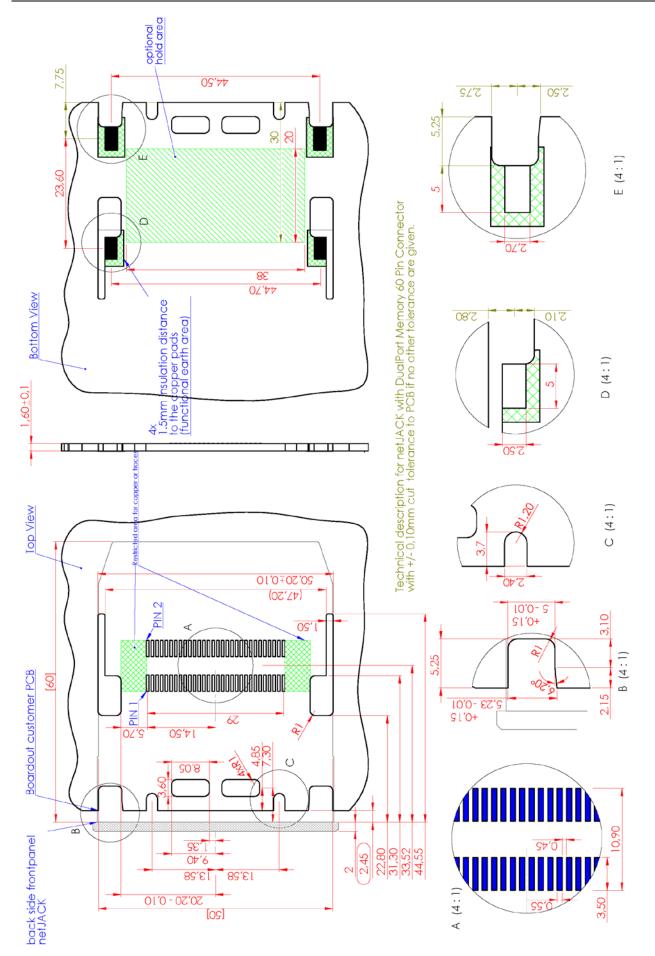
Dimension of carrier board for netJACK with dual-port memory 60-pin connector
